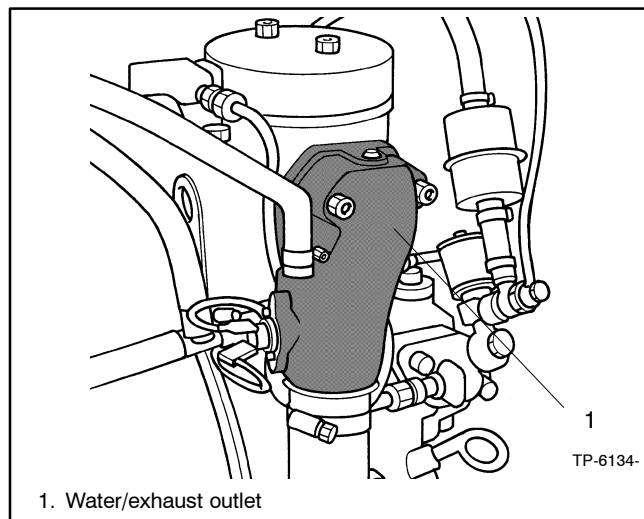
Mixer Elbow/Exhaust Connection, 3.5EFOZ/4EOZ Model Only
